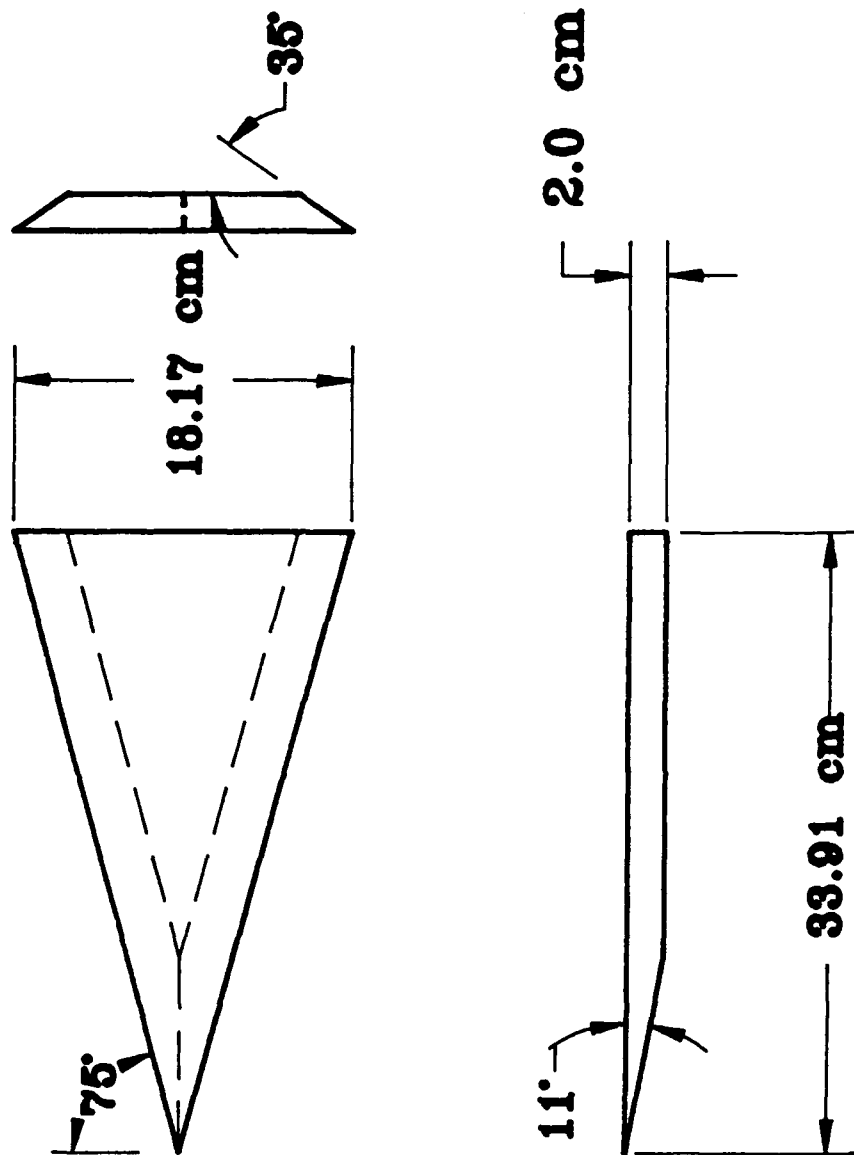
Three-View Sketch of Sharp-Edged Delta Wing.
